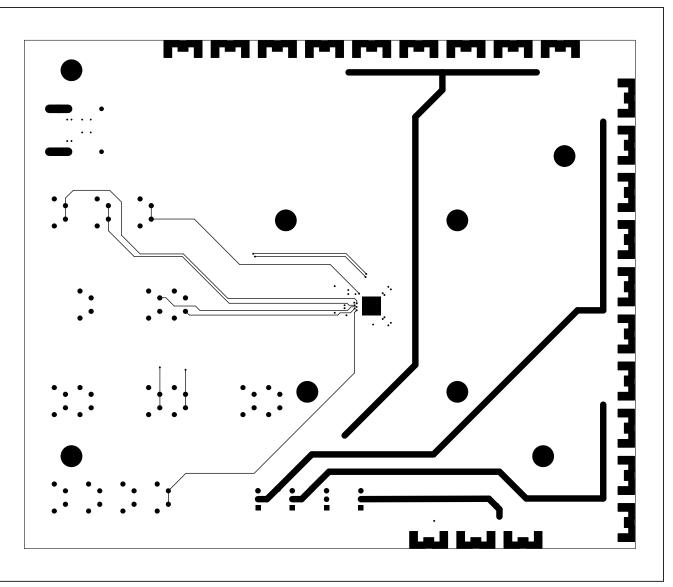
MAX3638 EV Kit PCB Layout—Solder Side
